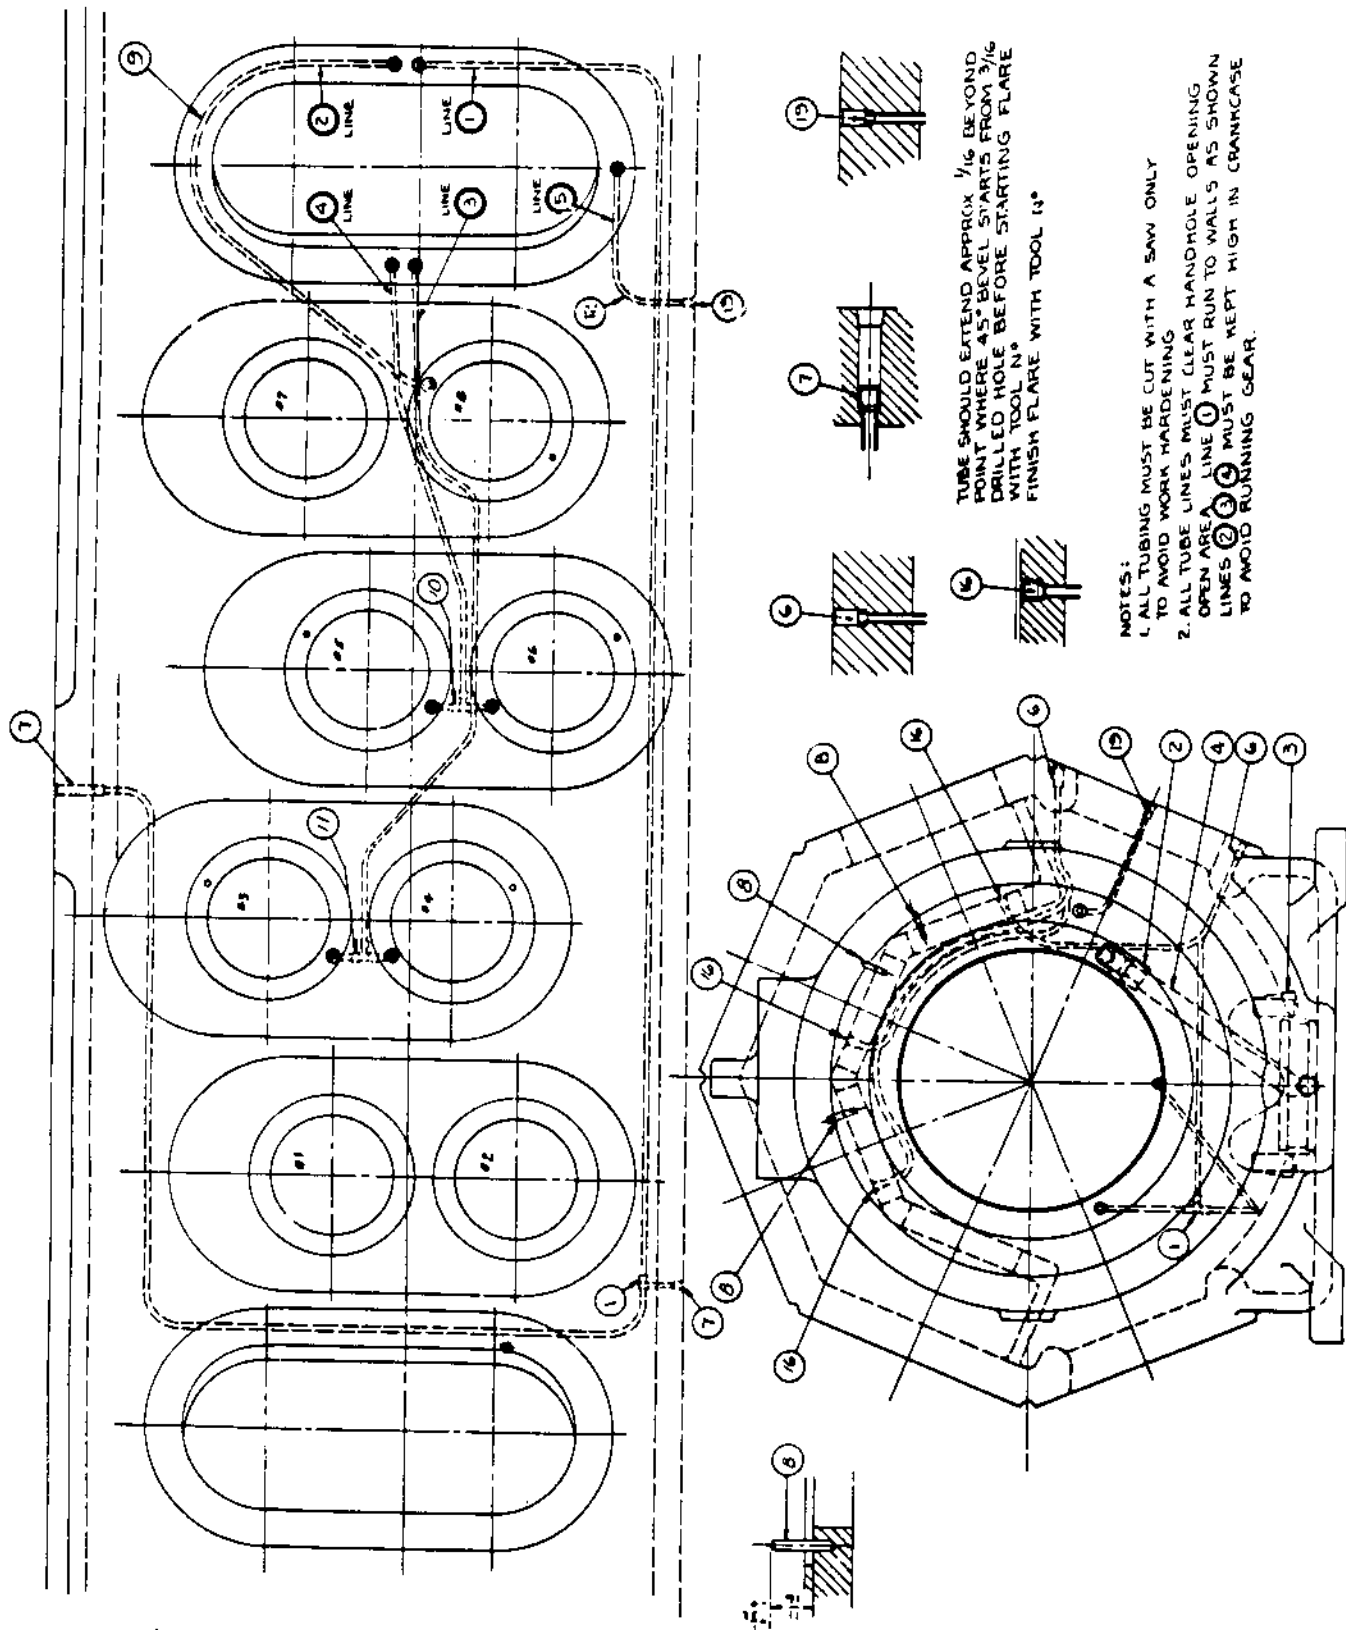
Model E Open Compressor - 8 Cylinder
